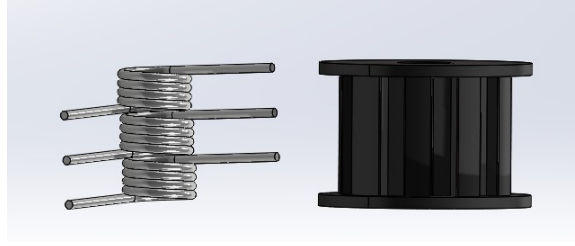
CAD of the finalized stack of torsion spring, size comparison to CAD of finalized gear
